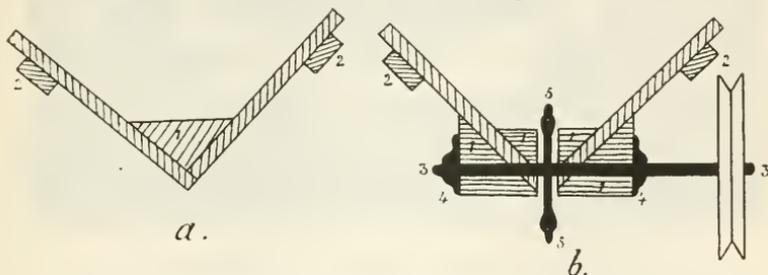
(a) Section of elevator; (b) top end of elevator; (1, 1) angle rails; (2, 2) battens; (3, 3) spindle; (4, 4) bearings; (5) sprocket wheel.
